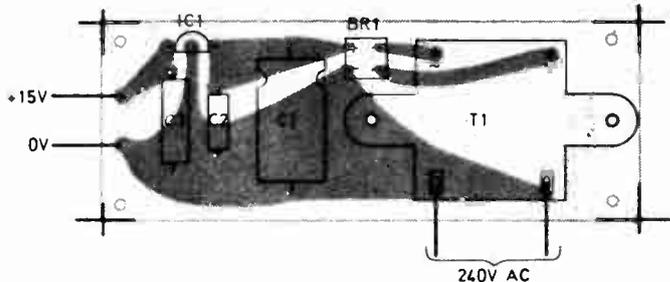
Component overlay of PSU Mains earth is connected to T1 by a solder tag under the mounting bolt.
